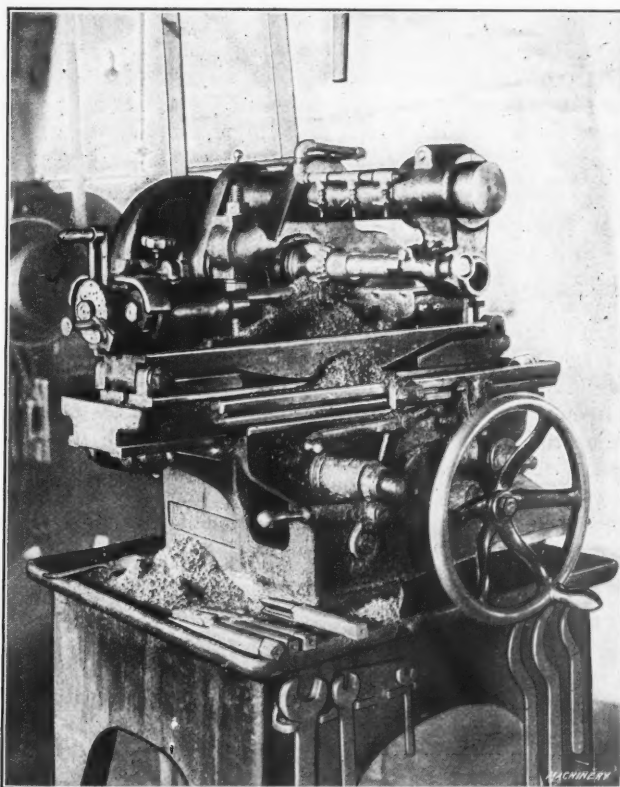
Typical View of Milling Machine used in Manufacturing, showing Lack of Chip Room on Table
